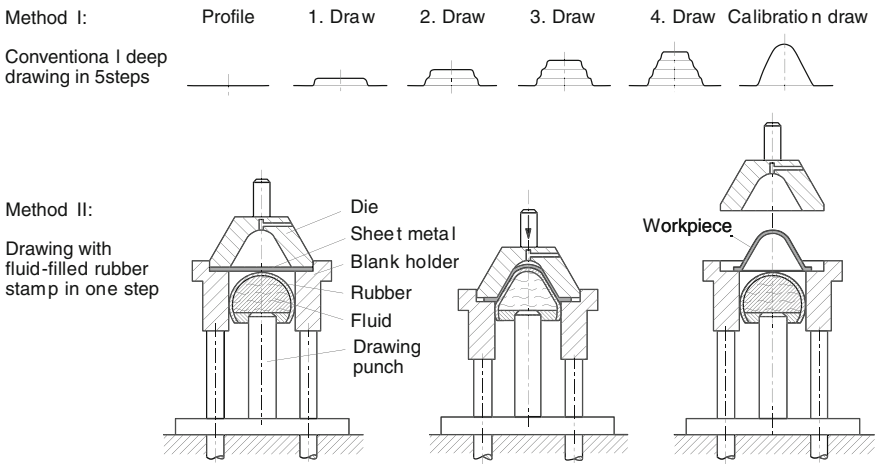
Deep drawing of a reflector [OEHL01]
